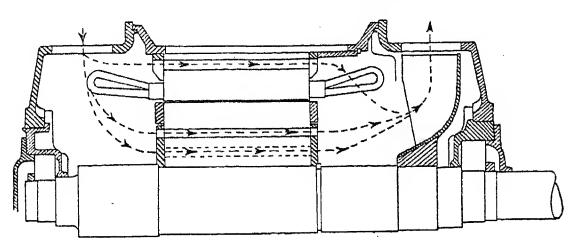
h.p., 960-r.p.m. squirrel-cage motor with centrifugal fan.
